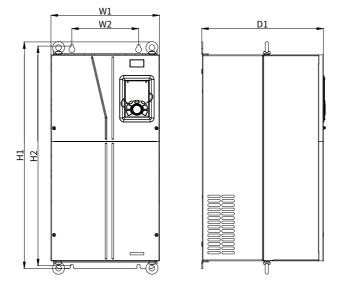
Outline and mounting dimensions of 55–132kW VFD models
